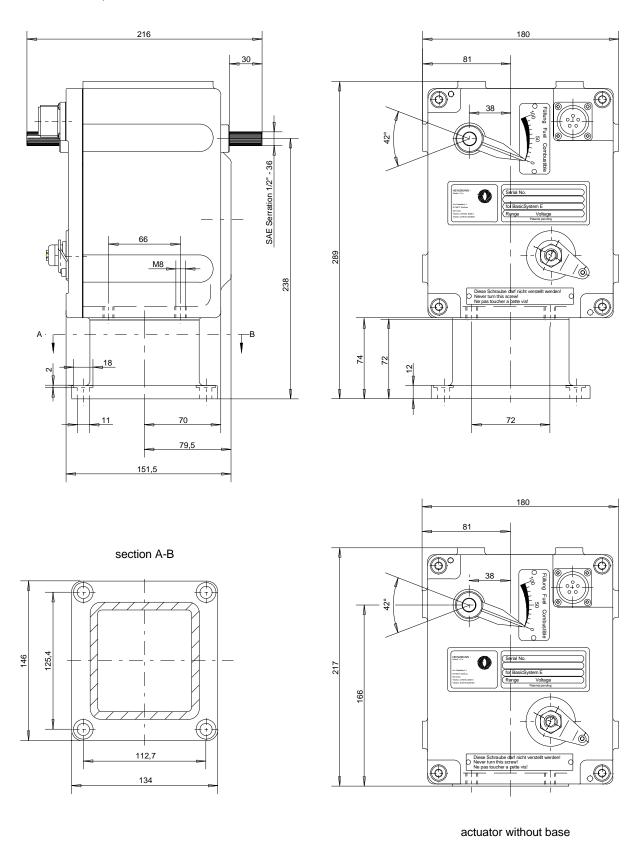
Dimensional Drawing StG 16-01, StG 30-01 and StG 40-01
